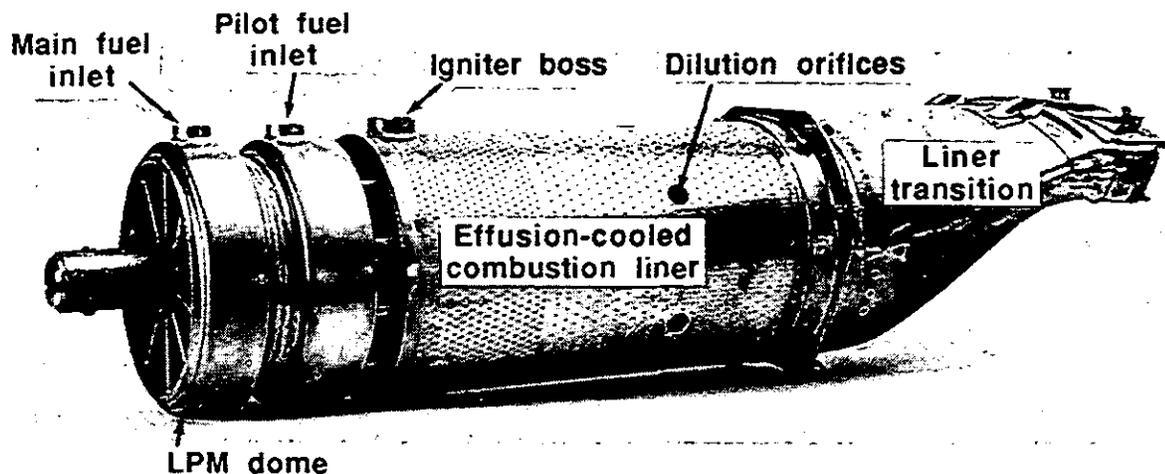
PHOTOGRAPH OF DRY LOW  $\text{NO}_x$  COMBUSTOR ASSEMBLY.
